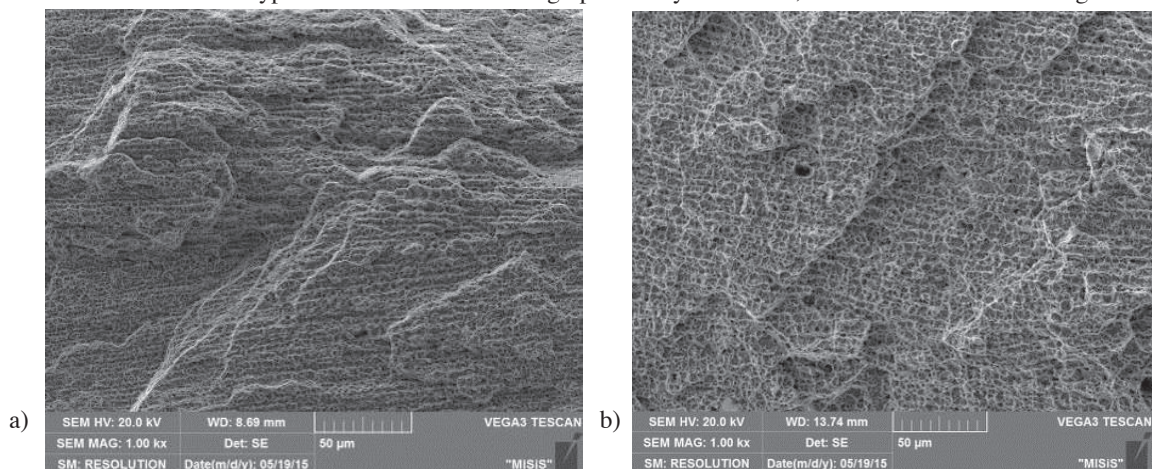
Fractures structures of samples after mechanical uniaxial tensile tests before (a) and after (b) heat treatment.
